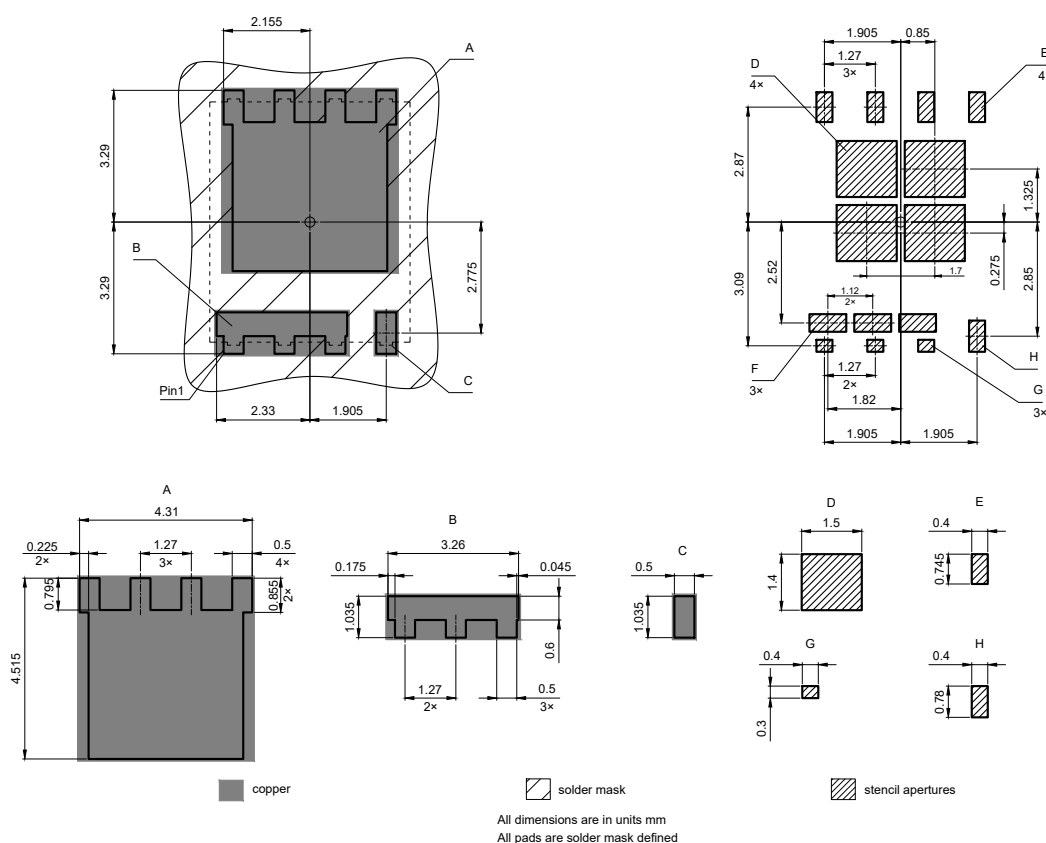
Footprint drawing PG-TDSON-8, dimensions in mm
